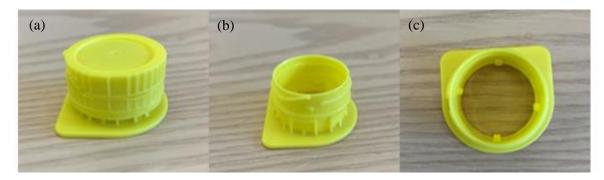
HeliCapTM 26 Pro (a) with lid (b) with the lid removed and (c) showing the knobs used for attaching to the fixture.
